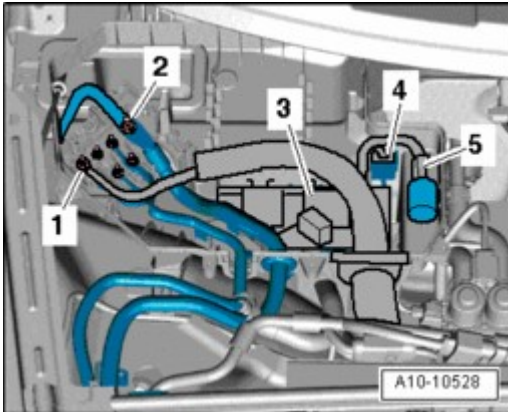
Identifying Suppressor, Electrical Harness Connector, And Main Fuse Carrier
